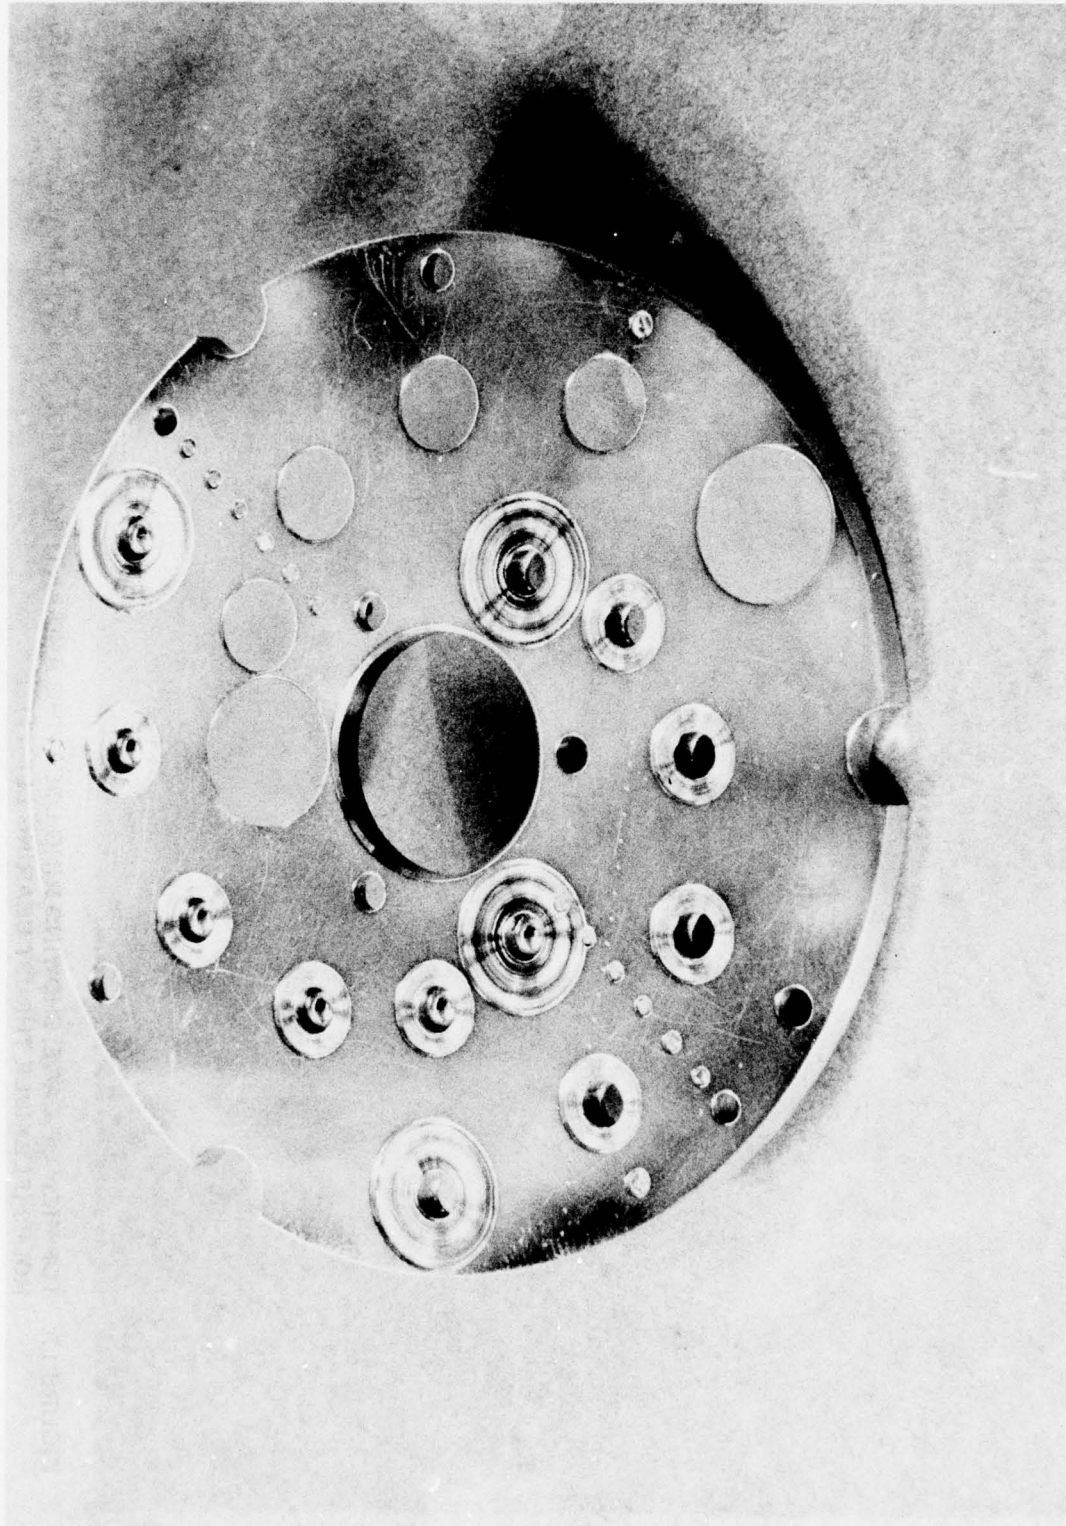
VIEW OF UNDERSIDE OF CAGE, SHOWING ARRANGEMENT FOR RETENTION OF BALLS AND SPRING PLATES (FLEXIBLE THRU-IT BEARING LLF-1T)
